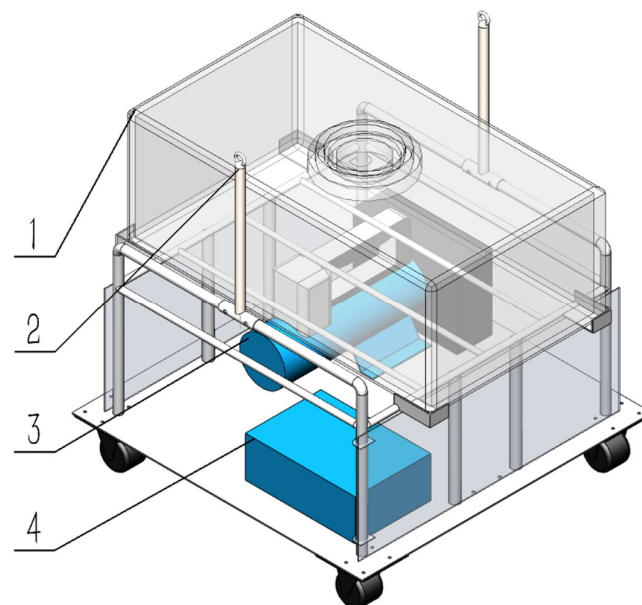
Outer frame assembly. 1—Water Tank, 2—Hook, 3—Plunger Pump, 4—Lithium Battery.
